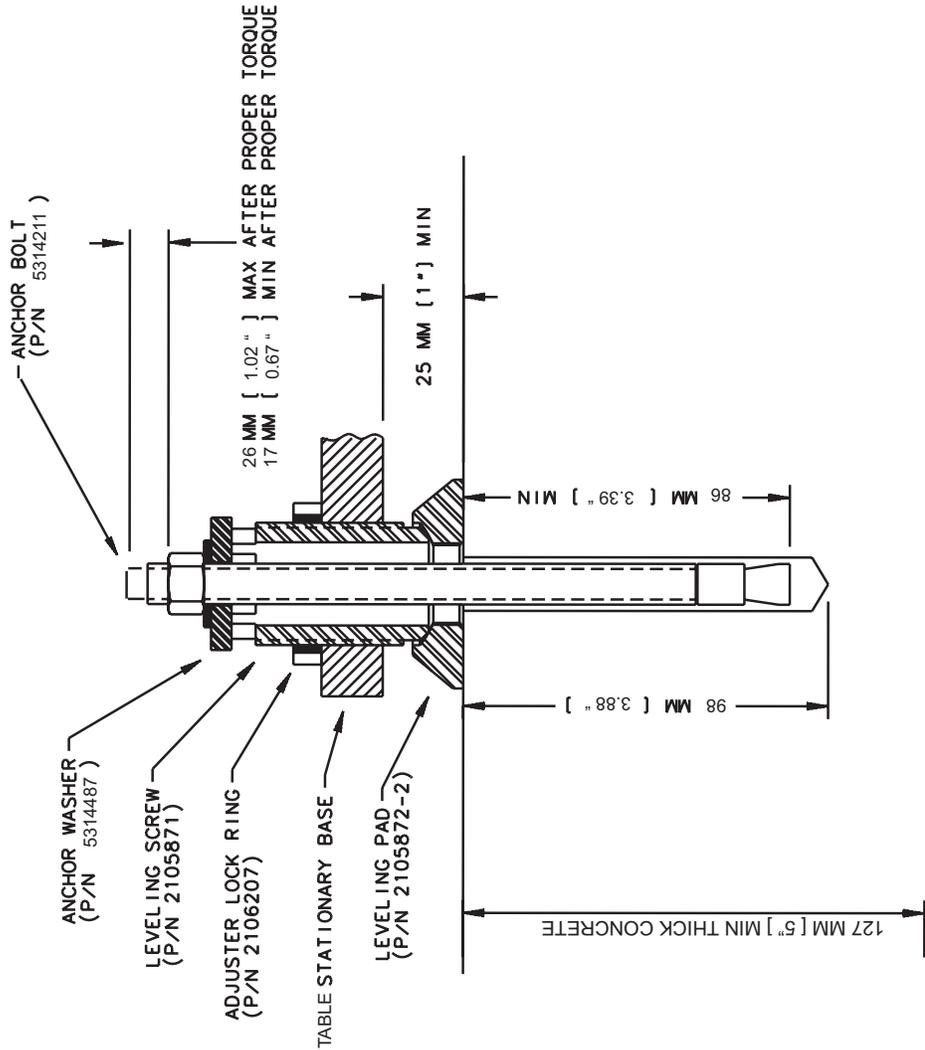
Typical Floor Anchor, Table (GT650lbs)
